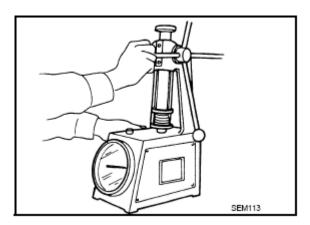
Checking Valve Spring Pressure Courtesy of NISSAN MOTOR CO., U.S.A.
